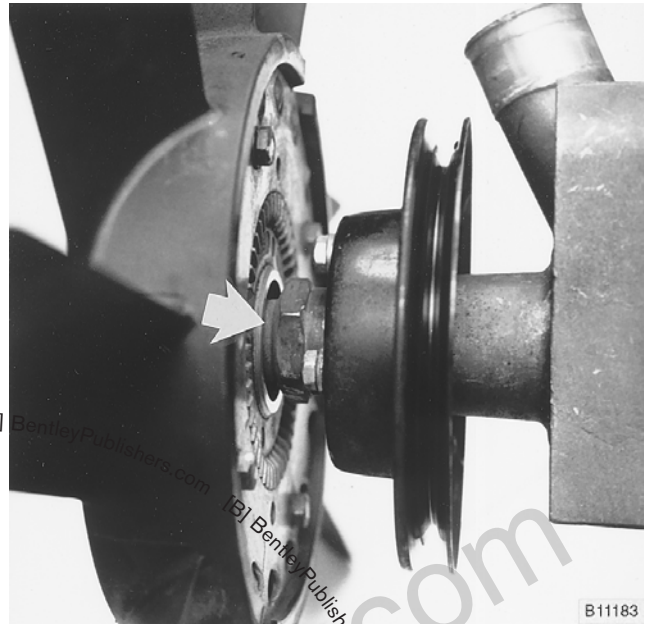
Radiator cooling fan nut (arrow). Nut has left-hand threads.
